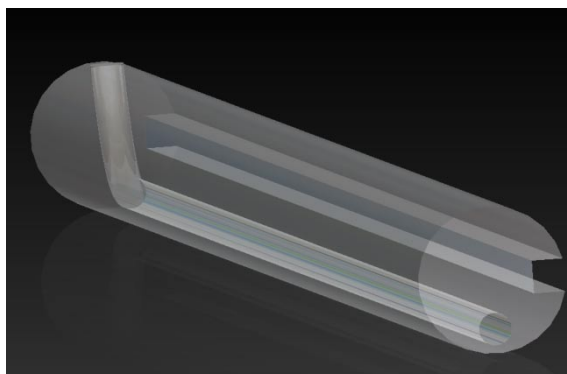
Internal component with track for injection component. Extruded rectangular track would for alignment with external
